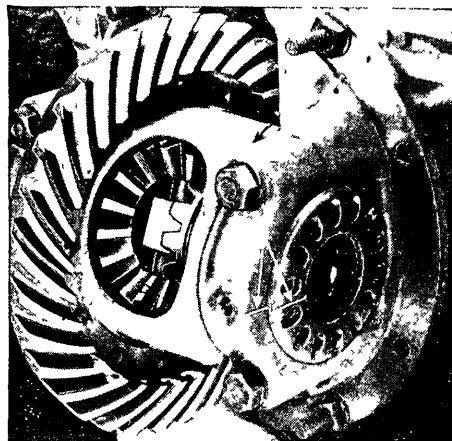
Marking differential adjusting nuts and bearing caps before dismantling assembly
